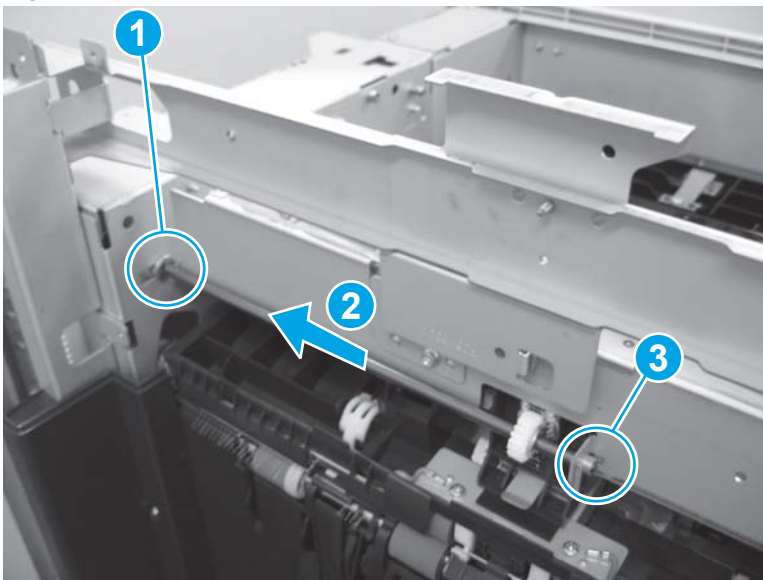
Remove the upper cross member assembly (10 of 13)
